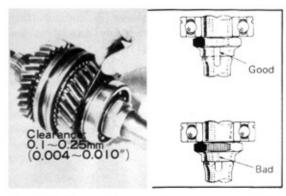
Thrust Clearance Measurement and Nut Peening
